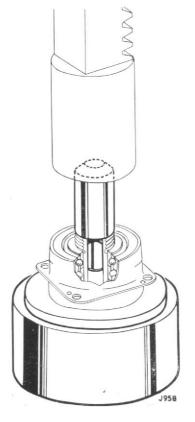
Split bush T.74756, pot fixture T.74757, and adapter T.74748, for removing bearing from lower driving gear.
